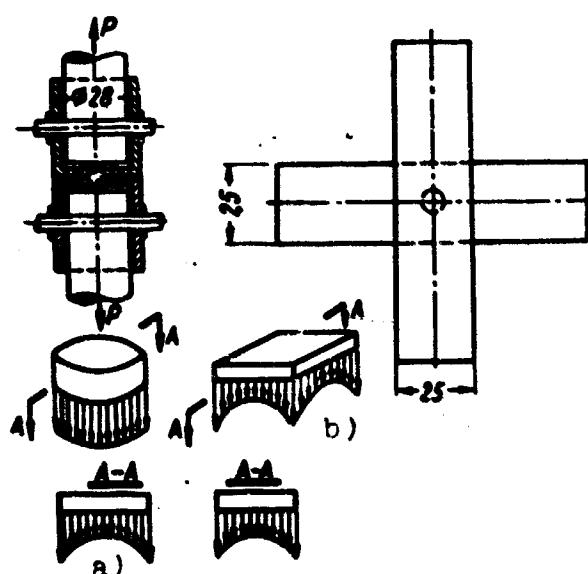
Welded samples for breaking tests: a) special; b) usual cross-like.
